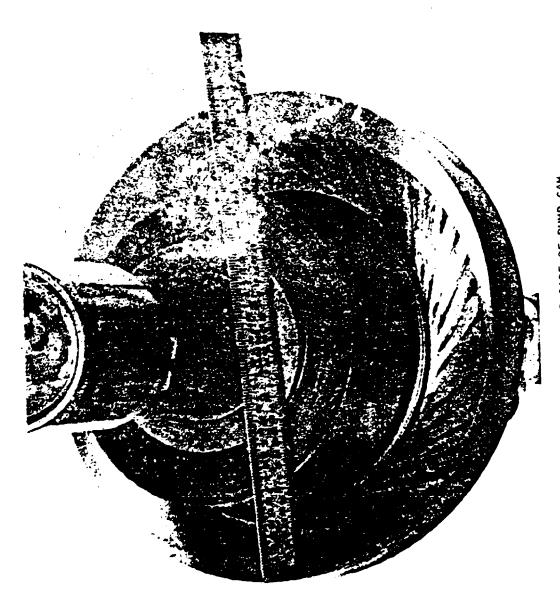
PRESSURE BUILD-UP SIDE OF PUMP CAM
